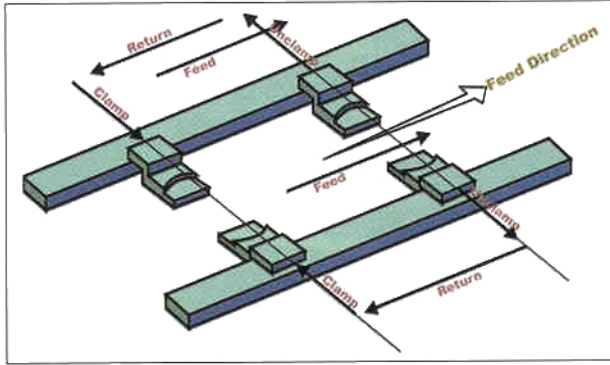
Two-dimensional transfer system slides the workpiece on top of the dies.
